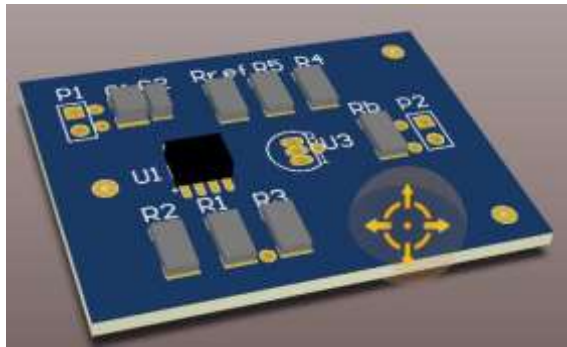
3D VIEW OF PRINTED MATTER.
